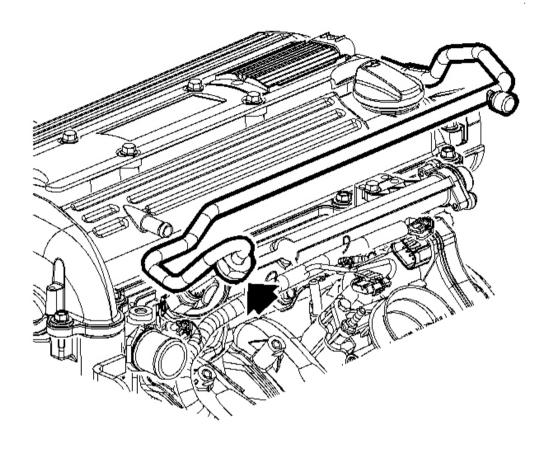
Positioning The Fuel Transfer Line Assembly Courtesy of GENERAL MOTORS CORP.
